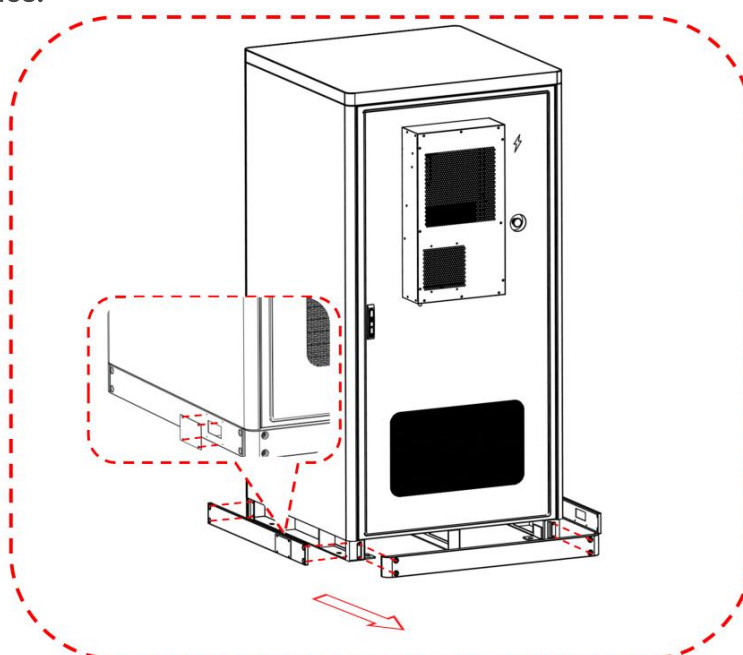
Diagram of the bottom enclosure of the equipment
